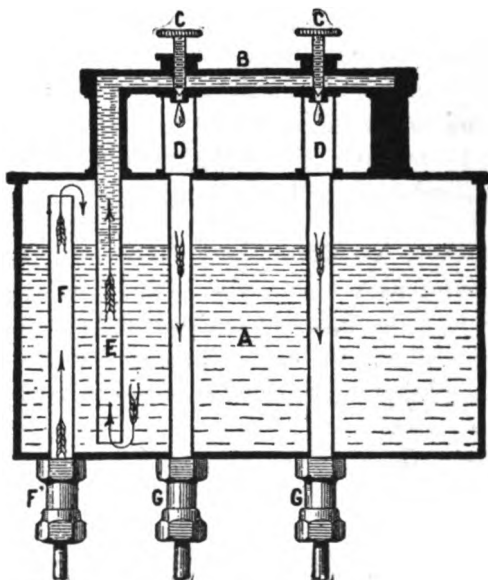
TYPICAL FORCE-FEED LUBRICATOR, OPERATING BY AIR OR GAS PRESSURE, INSTEAD OF A PUMP.
